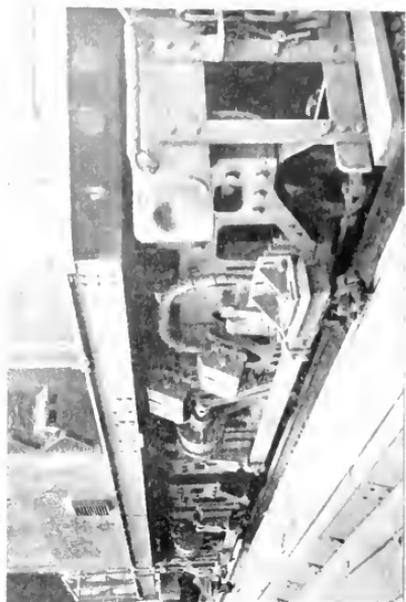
Close View Showing Locomotive Shoe Rigging and Third Rail
